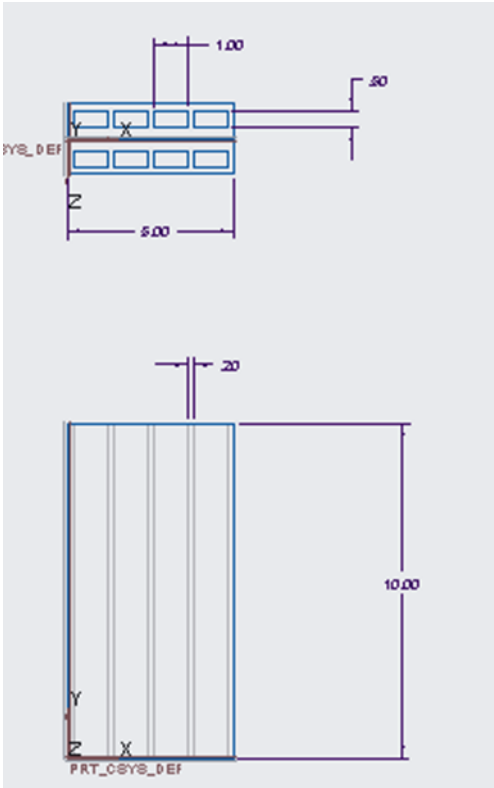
Engineering Drawing of Heat Exchanger (cm)
